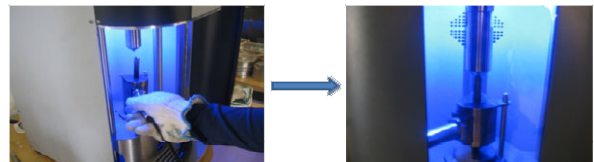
Placing the filled cylinder in the retaining pin inside the injection mold machine.
